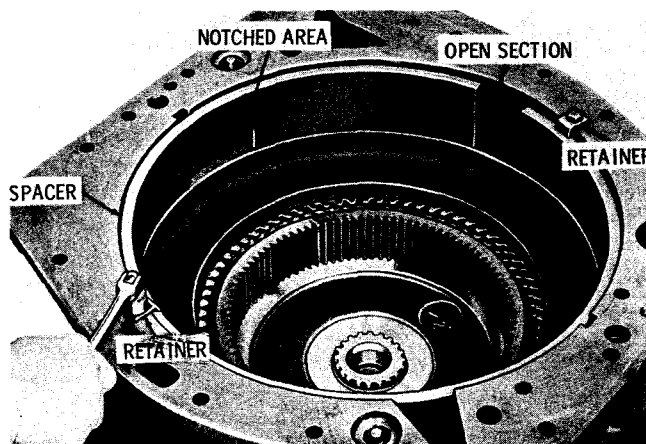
Installing high-splitter clutch back plate spacer retainers S1686
